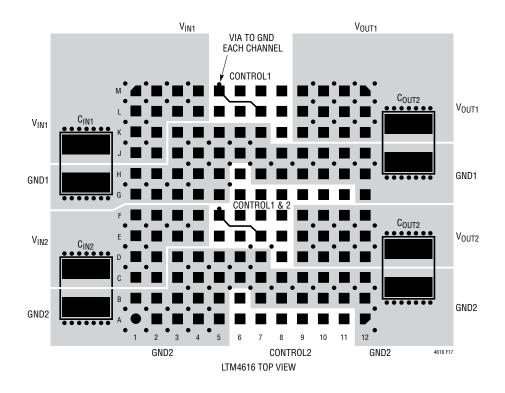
Recommended PCB Layout (LGA and BGA PCB Layouts Are Identical with the Exception of Circle Pads for BGA. See Package Description.)
